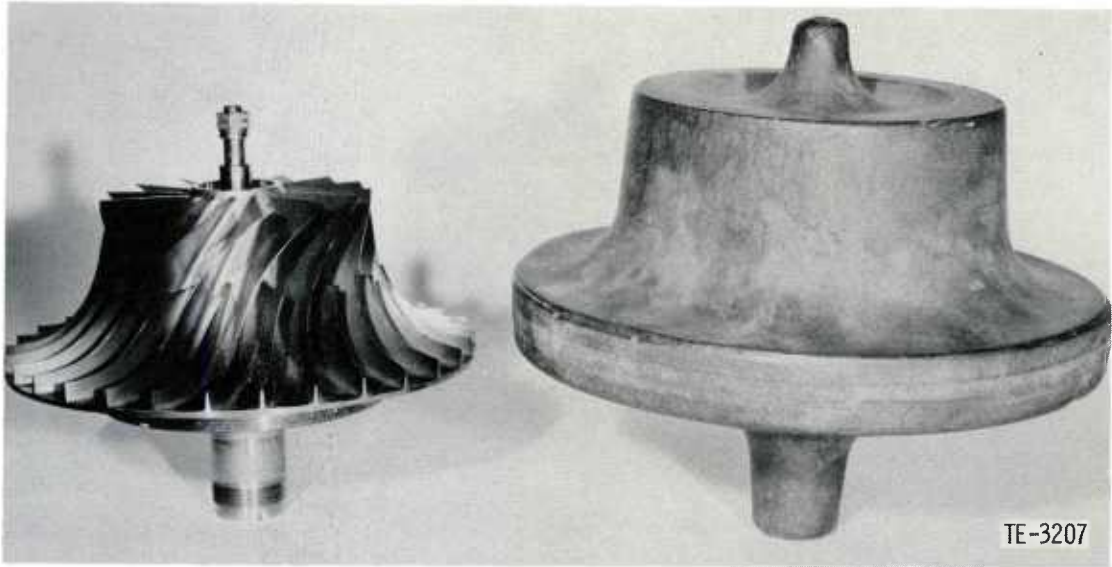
250-C28 impeller forging before and after machining to final configuration.
